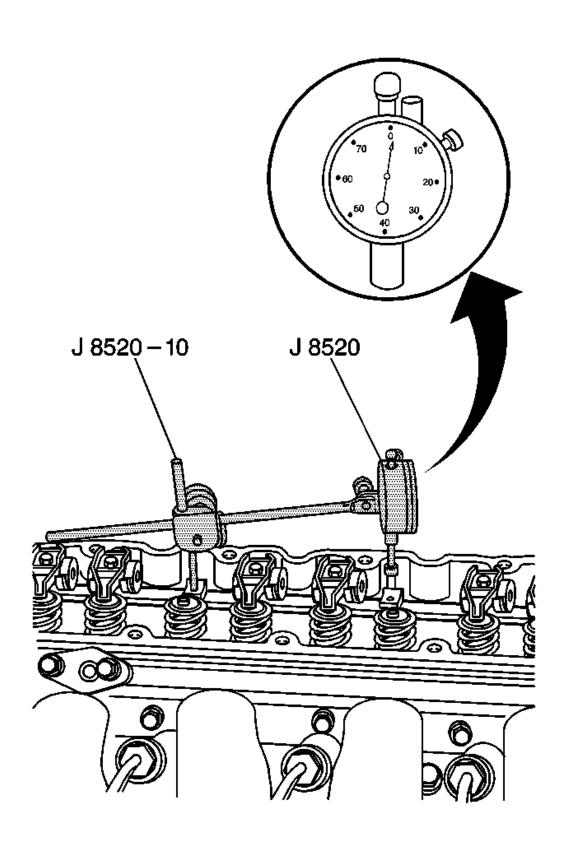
Measuring Camshaft Runout Courtesy of GENERAL MOTORS CORP.
